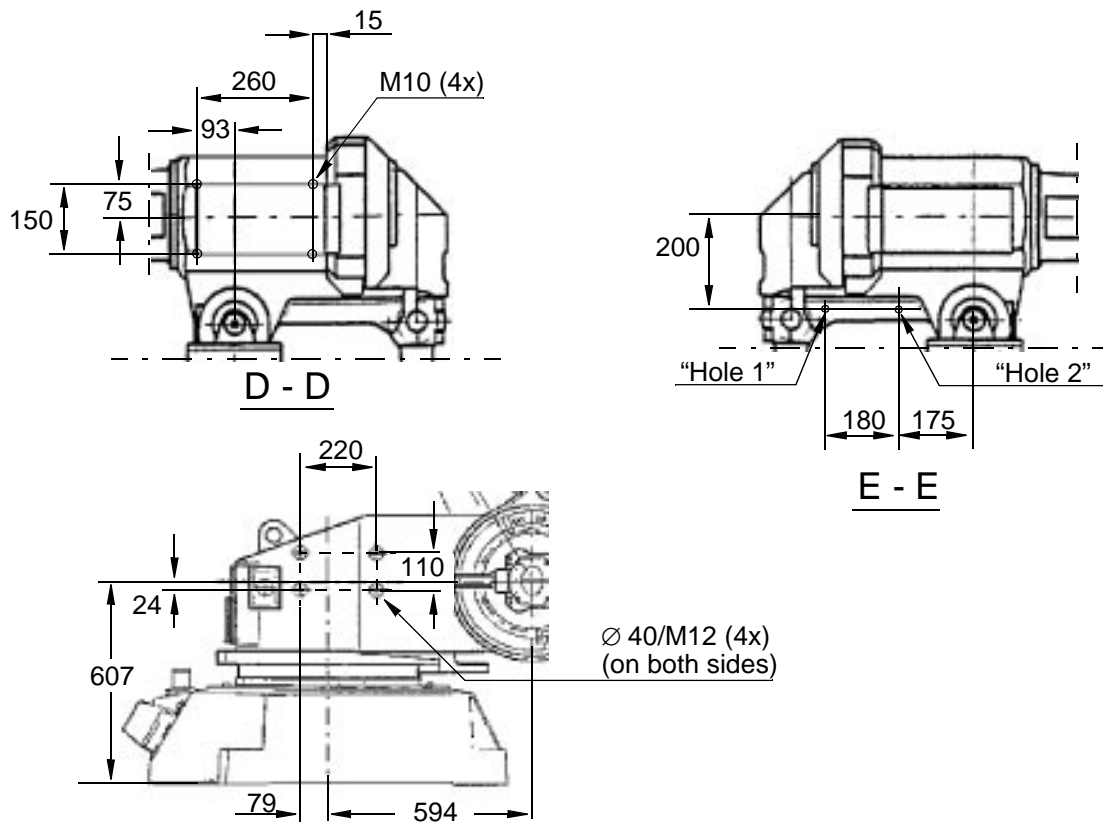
Holes for mounting extra equipment (dimensions in mm).
